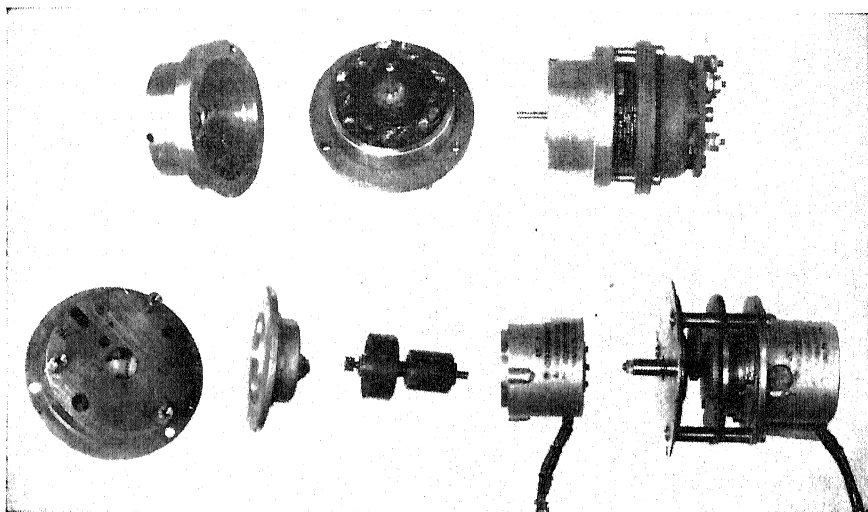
Pioneer-Bendix type CK-5 servo motor: squirrel-cage rotor and drag cup used for damping; small Alnico damping magnet is mounted in end bell; integral gear-reduction unit.
